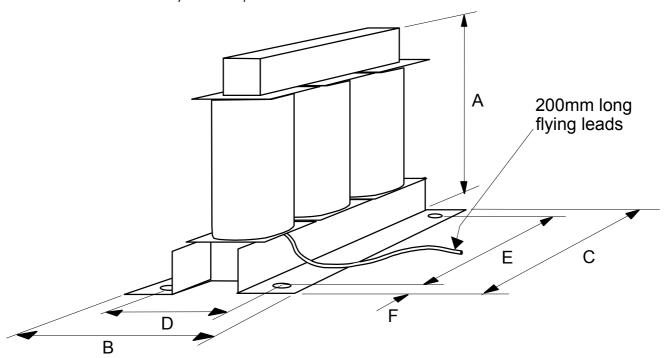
Filter Mounting Details using Part No. CO389456 for Frame 4: 380-830 Amp (refer to Chapter 11: "Technical Specifications" - External AC Suppy (RFI) Filters)
